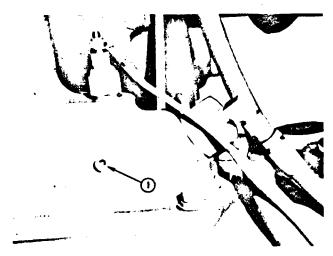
, (N11949). Glow plug inspection hole — N/NT-855 Engine
